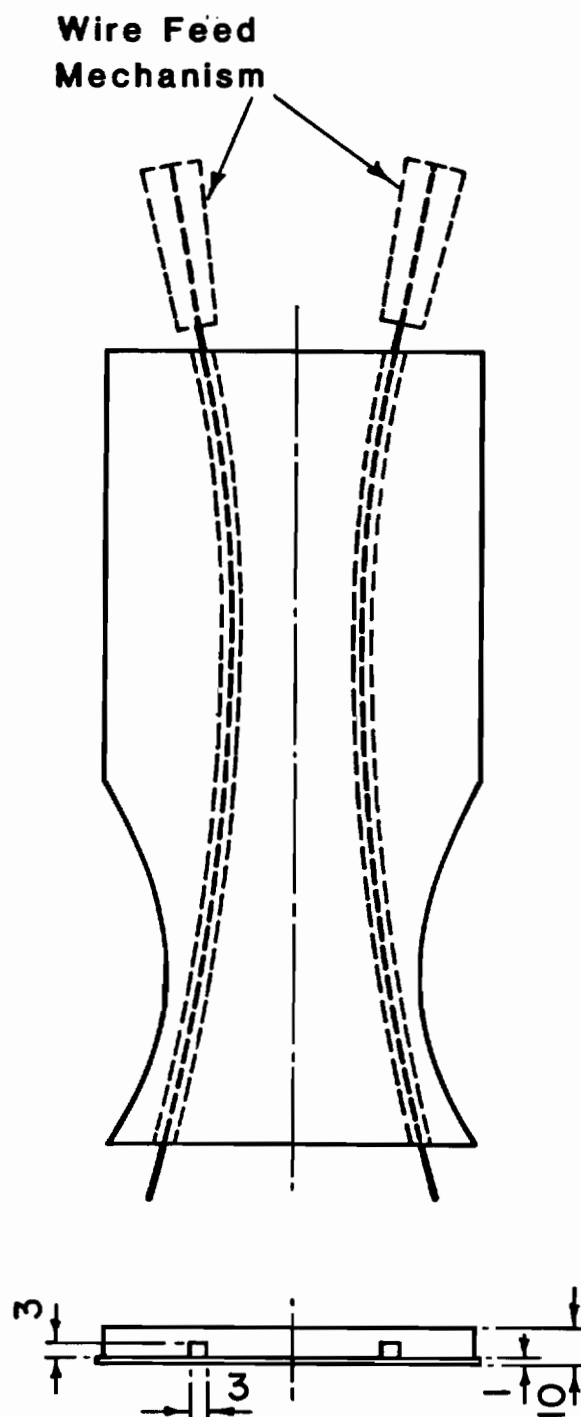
CONSUMABLE GUIDE PLATE ELECTRODE USED BY V. I. SVETLOPOLYANSKII FOR WELDING TYPE R43 TRAM RAIL.
